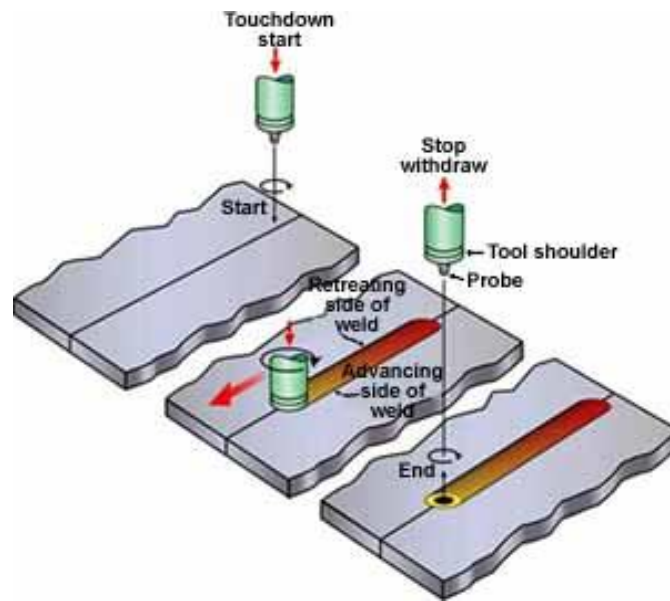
Schematic illustrations of friction stir welding process [22].
